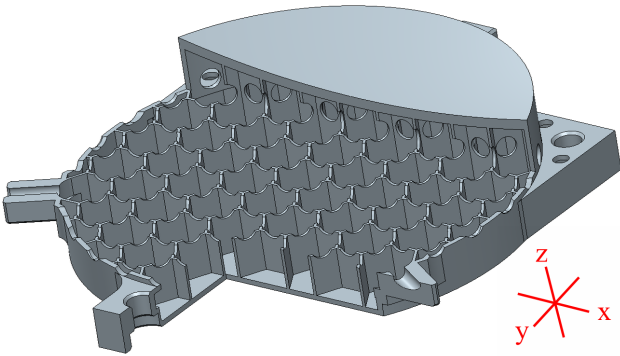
CAD model of the honeycomb mirror with sectioning planes added to demonstrate the hollow structure
